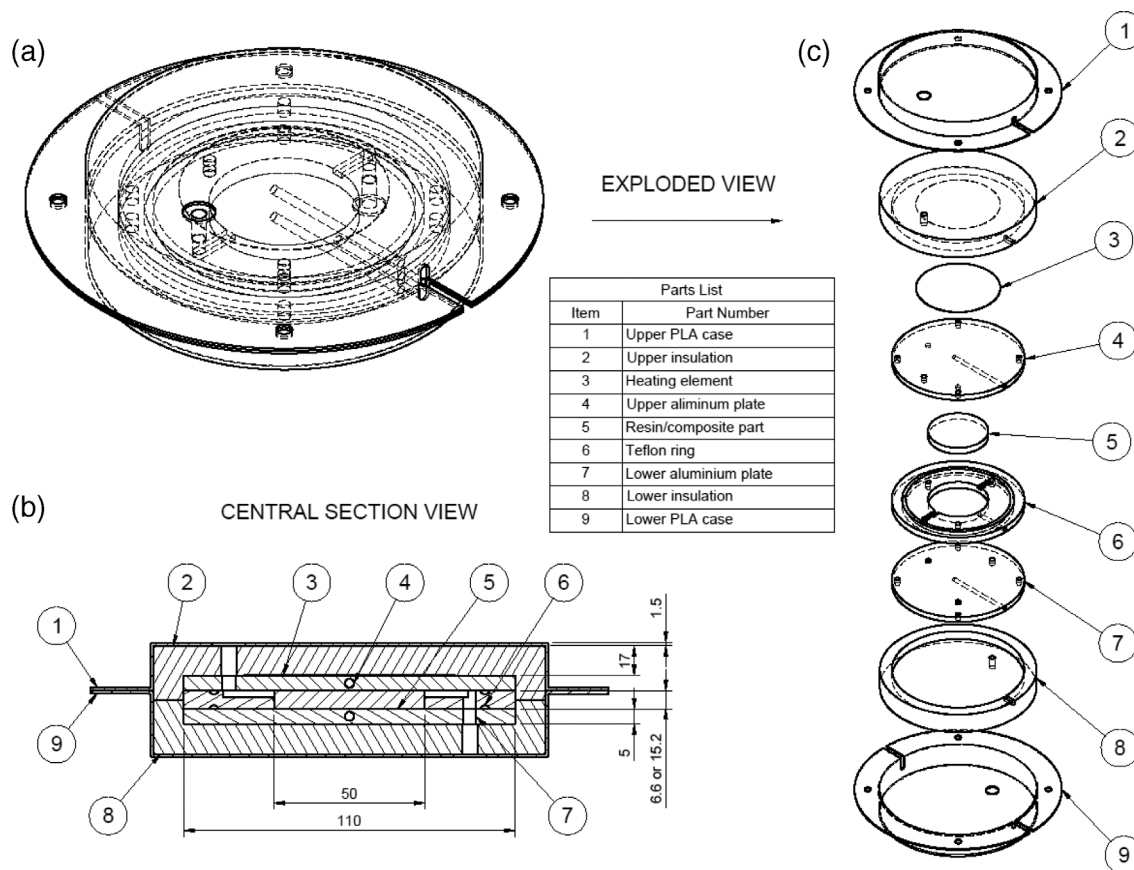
Components of the experimental device for VARTM processing with a single heating element: (a) isometric view of the assembly with interior geometry viewed by dashed lines, (b) cross-section view with main dimensions, and (c) exploded view
